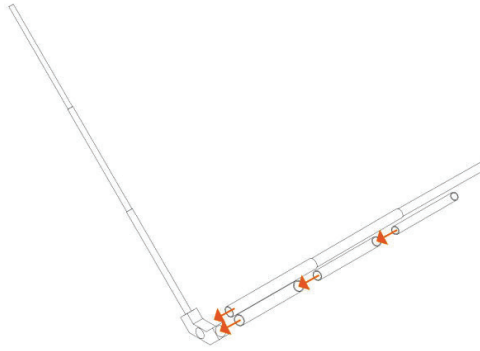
Telescoping structural members are used with a custom-designed connection unit
